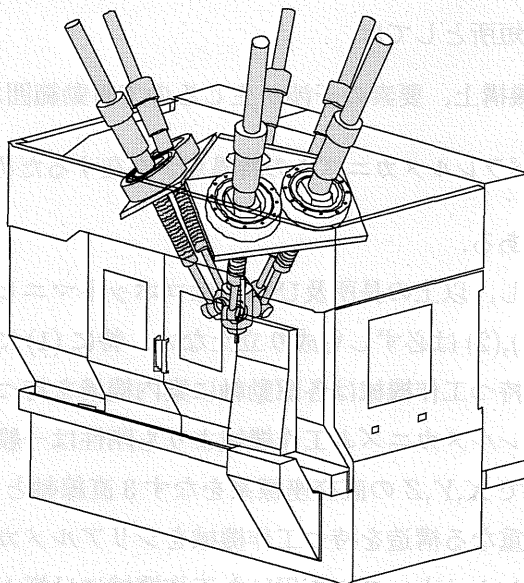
A Hexapod-type parallel kinematic machine tool, COSMO CENTER PM600
